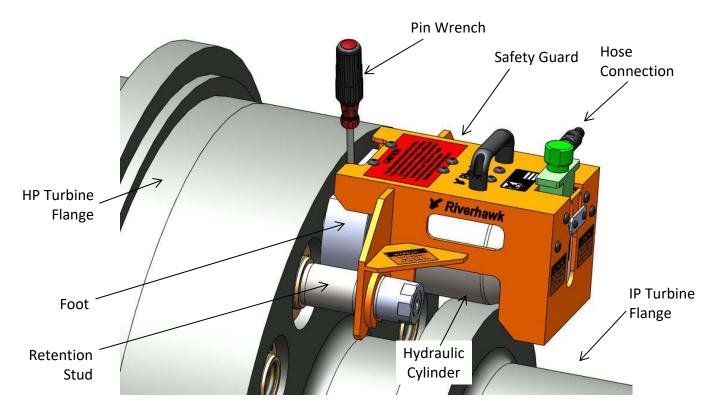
E – Features of the Hydraulic Tensioner HT-5298
